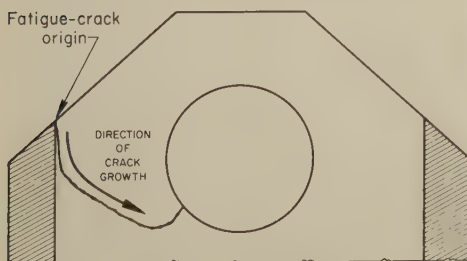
Schematic diagram showing the location of the crack origin and the direction of the crack growth in the fatigue fracture of the 4340 steel rotor fitting of Fig. 3 (Example 2)
